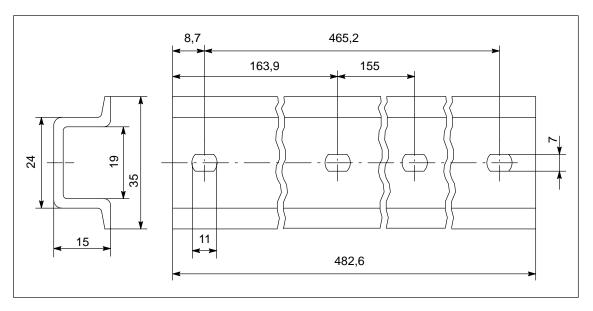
Dimension Drawing of the 483 mm Standard Rail
